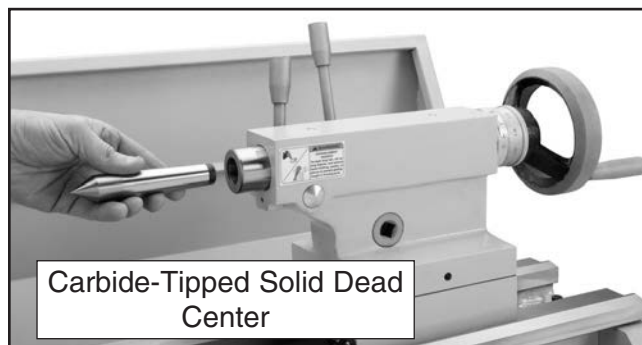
Inserting a carbide-tipped dead center in the tailstock.
